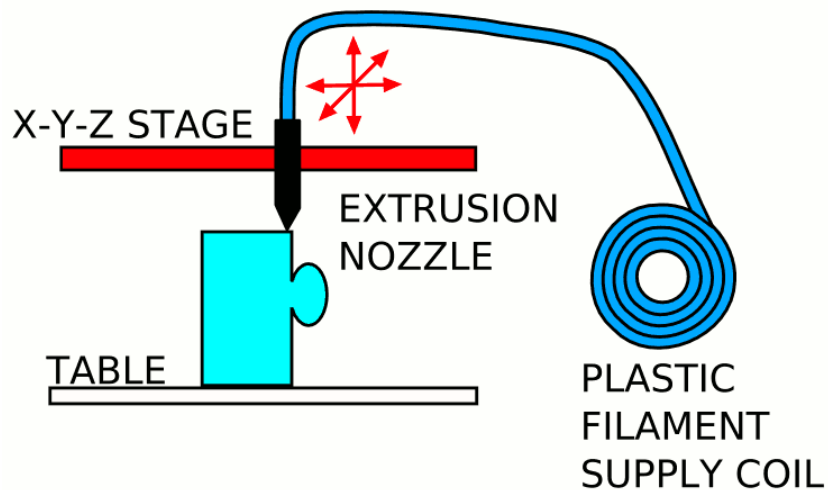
FDM manufacturing technique (Feygin, 1989)
